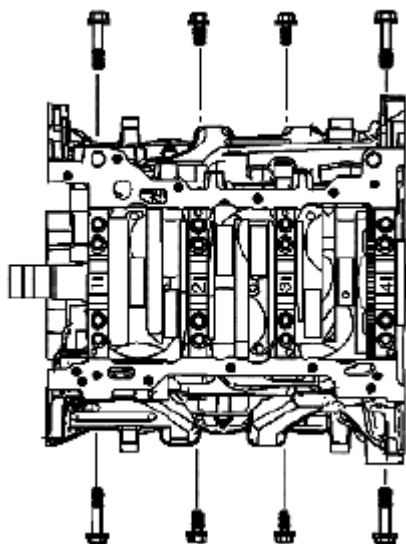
Identifying Short/Inner Side Main Cap And Bolts
